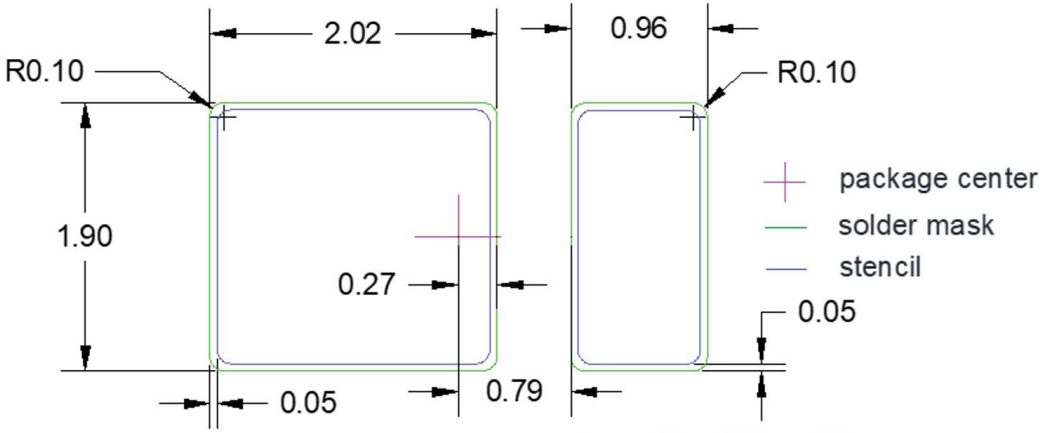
Recommended PCB solder pad layout for LUXEON 2835 Commercial Deep Dimming
